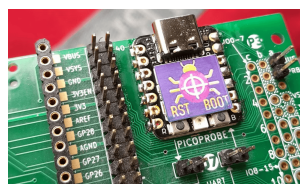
A SEED XIAO connected via SMD board-to-board soldering
